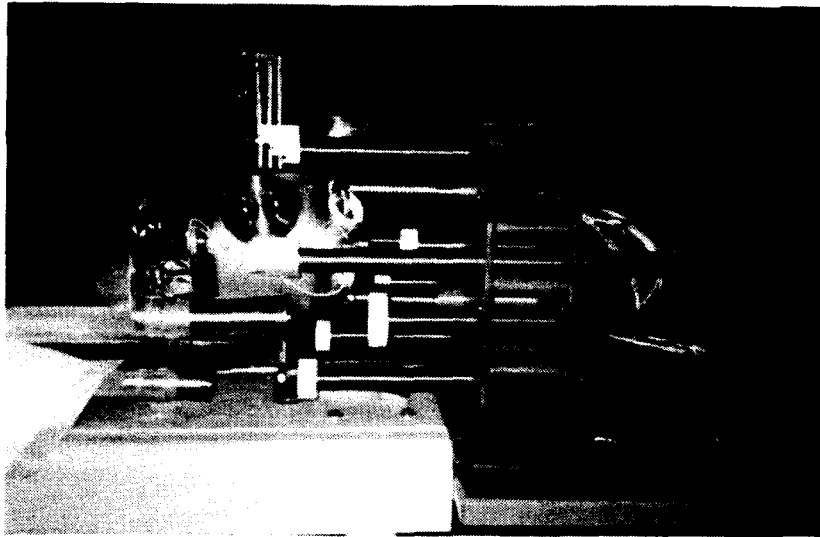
The gage being prepared to measure features on a magnet subassembly. The tubes of the gage will be brought forward until the (white) plastic end pieces contact their assigned features, such as pipe flanges and the end of the 20-K shield.
